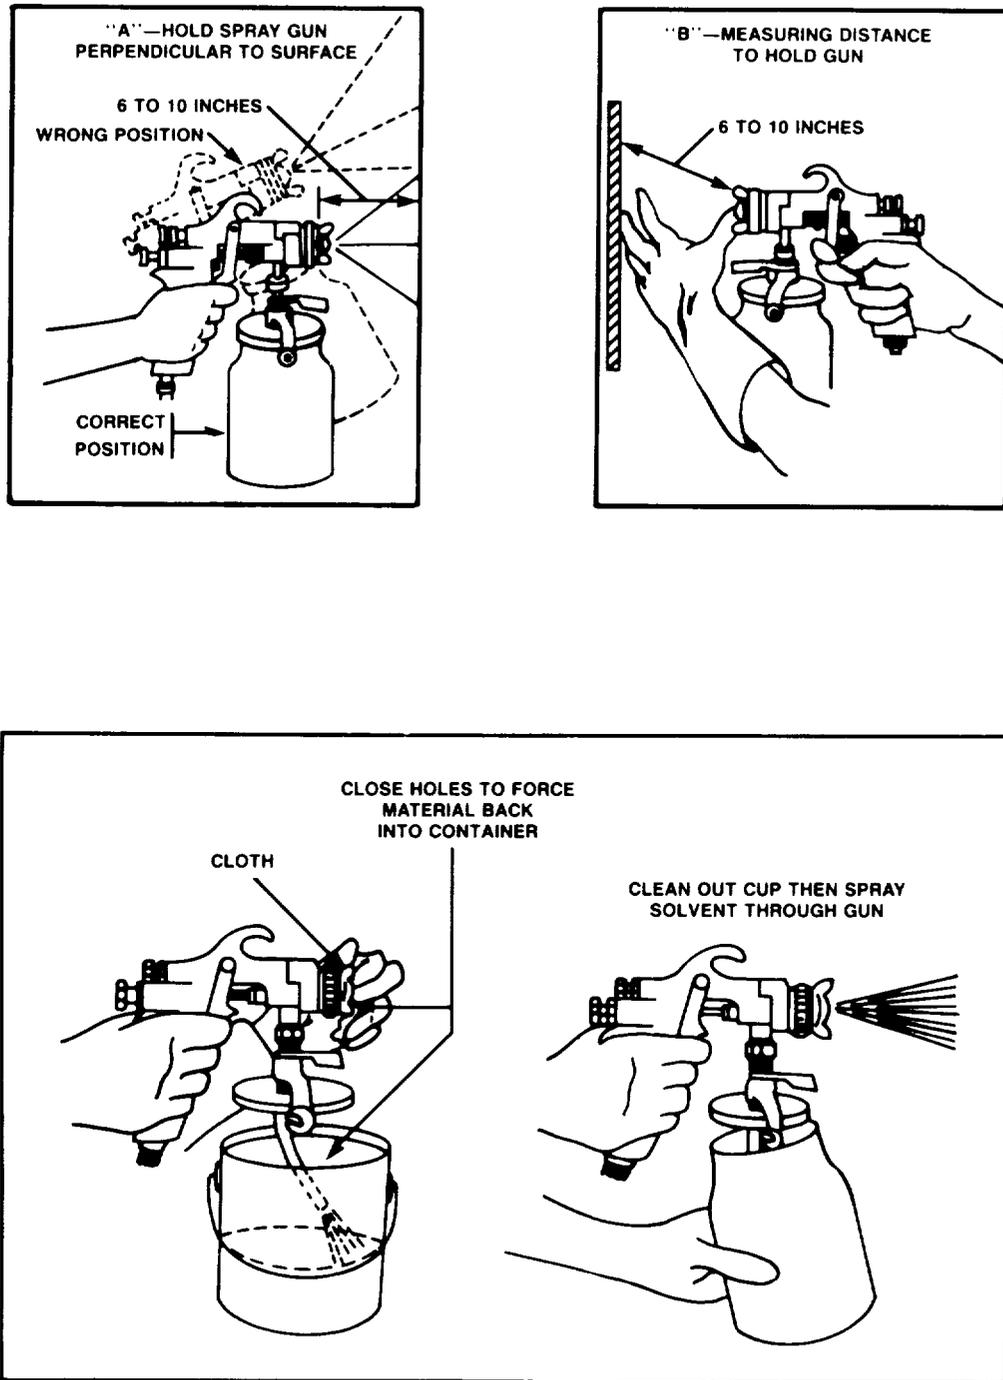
Spray Gun Cleaning and Painting Techniques.
